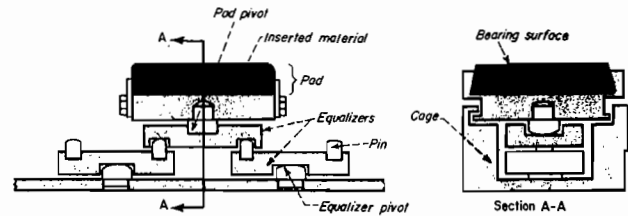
Water Lubricated Tilting Pad Equalized Thrust Bearing (from reference 45).
